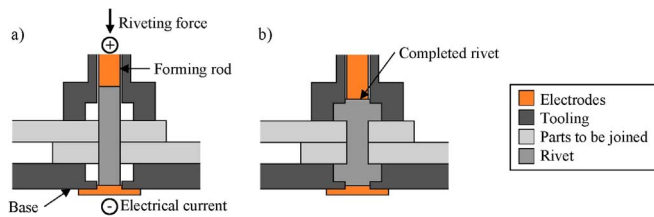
Thermoplastic composite riveting process: a) Before forming of rivet heads; b) After forming of rivet heads.
